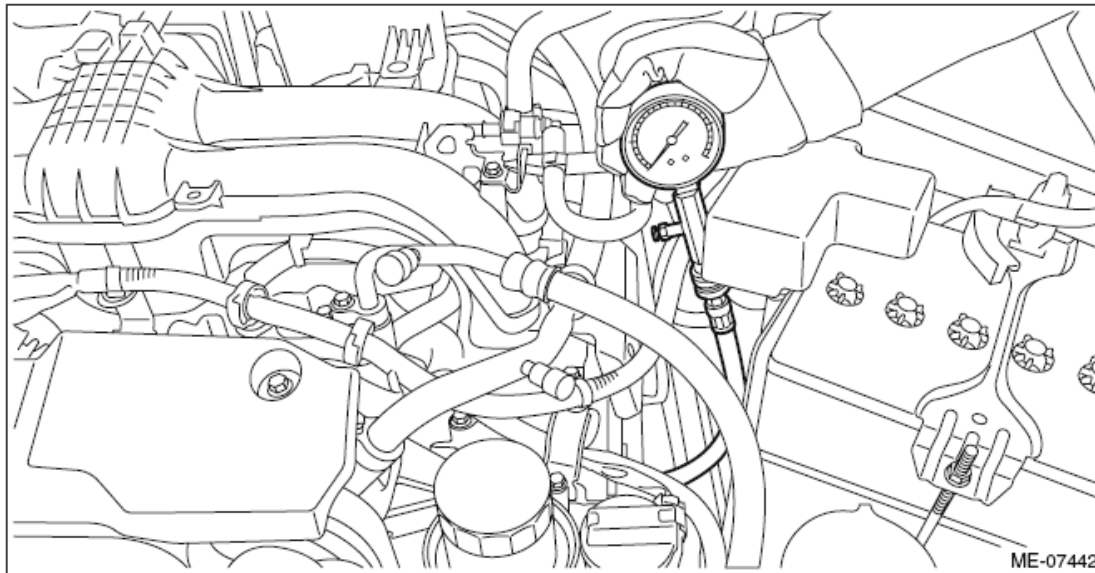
Installing Compression Gauge To Spark Plug Hole
